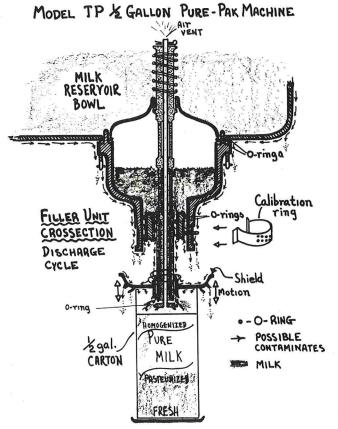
Cross section of a filling head of rotary type Pure-Pak machine illustrating improved sanitary construction. Routes of potential contaminants are also shown. Most contaminants being shunted off from carton by protective shield.
